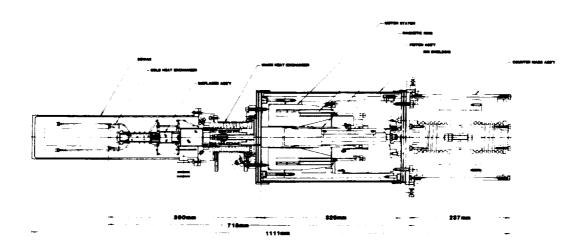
Layout drawing of 10°K Stirling cycle cooler.
